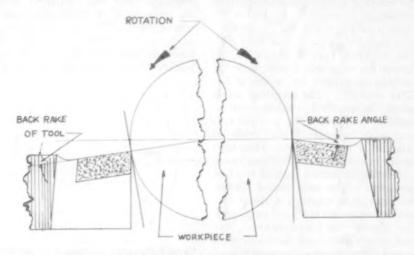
Positioning of the tool changes the tool's geometry. In this view, towards the chuck, the back rake angle is larger when the tool is set below the center line of the workpiece. (Baker and Kozacka)
